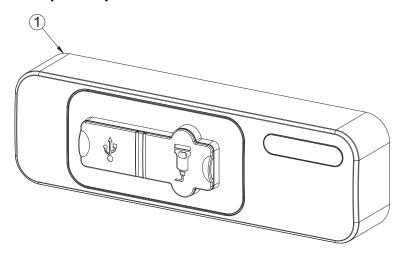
Transceiver Adapter Exploded View for PMLN7033
